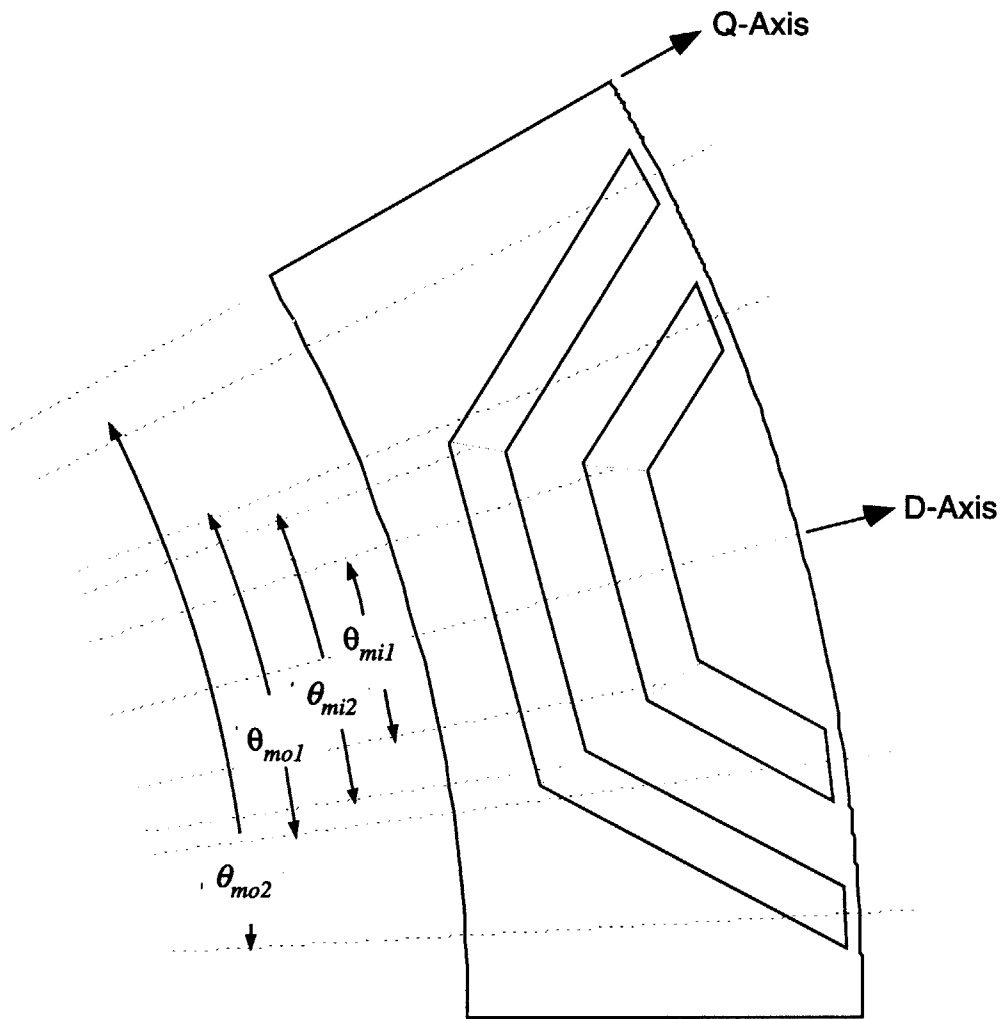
Rotor cross-section with angular magnet dimensions.
